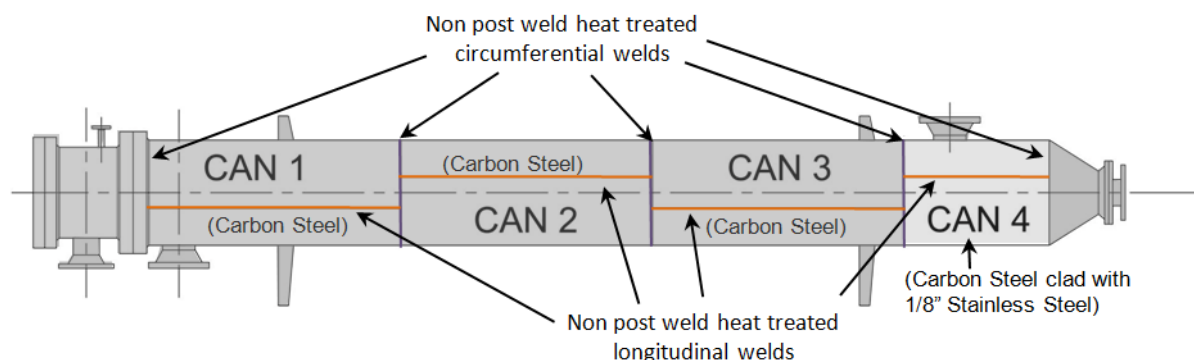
Fabrication Layout of the B and E Heat Exchangers
